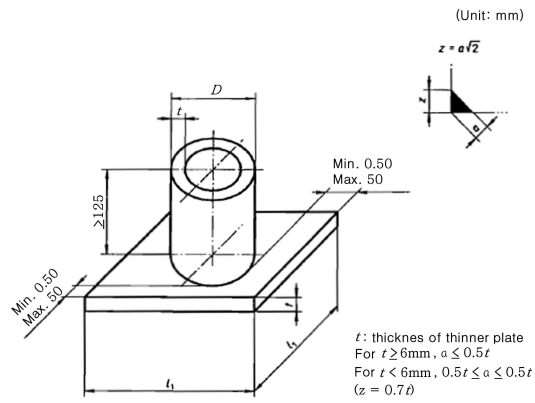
Dimensions and types of test assembly for pipe fillet welds
